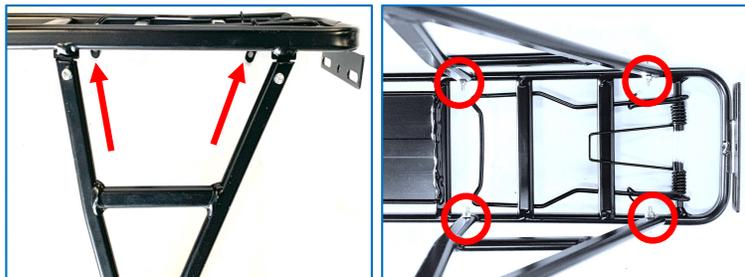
Slide each leg onto the welded tabs under the top and secure each connection with the M4 screws and nuts using a 3 mm hex wrench in the screw head and an 8 mm open end wrench on the nut.
